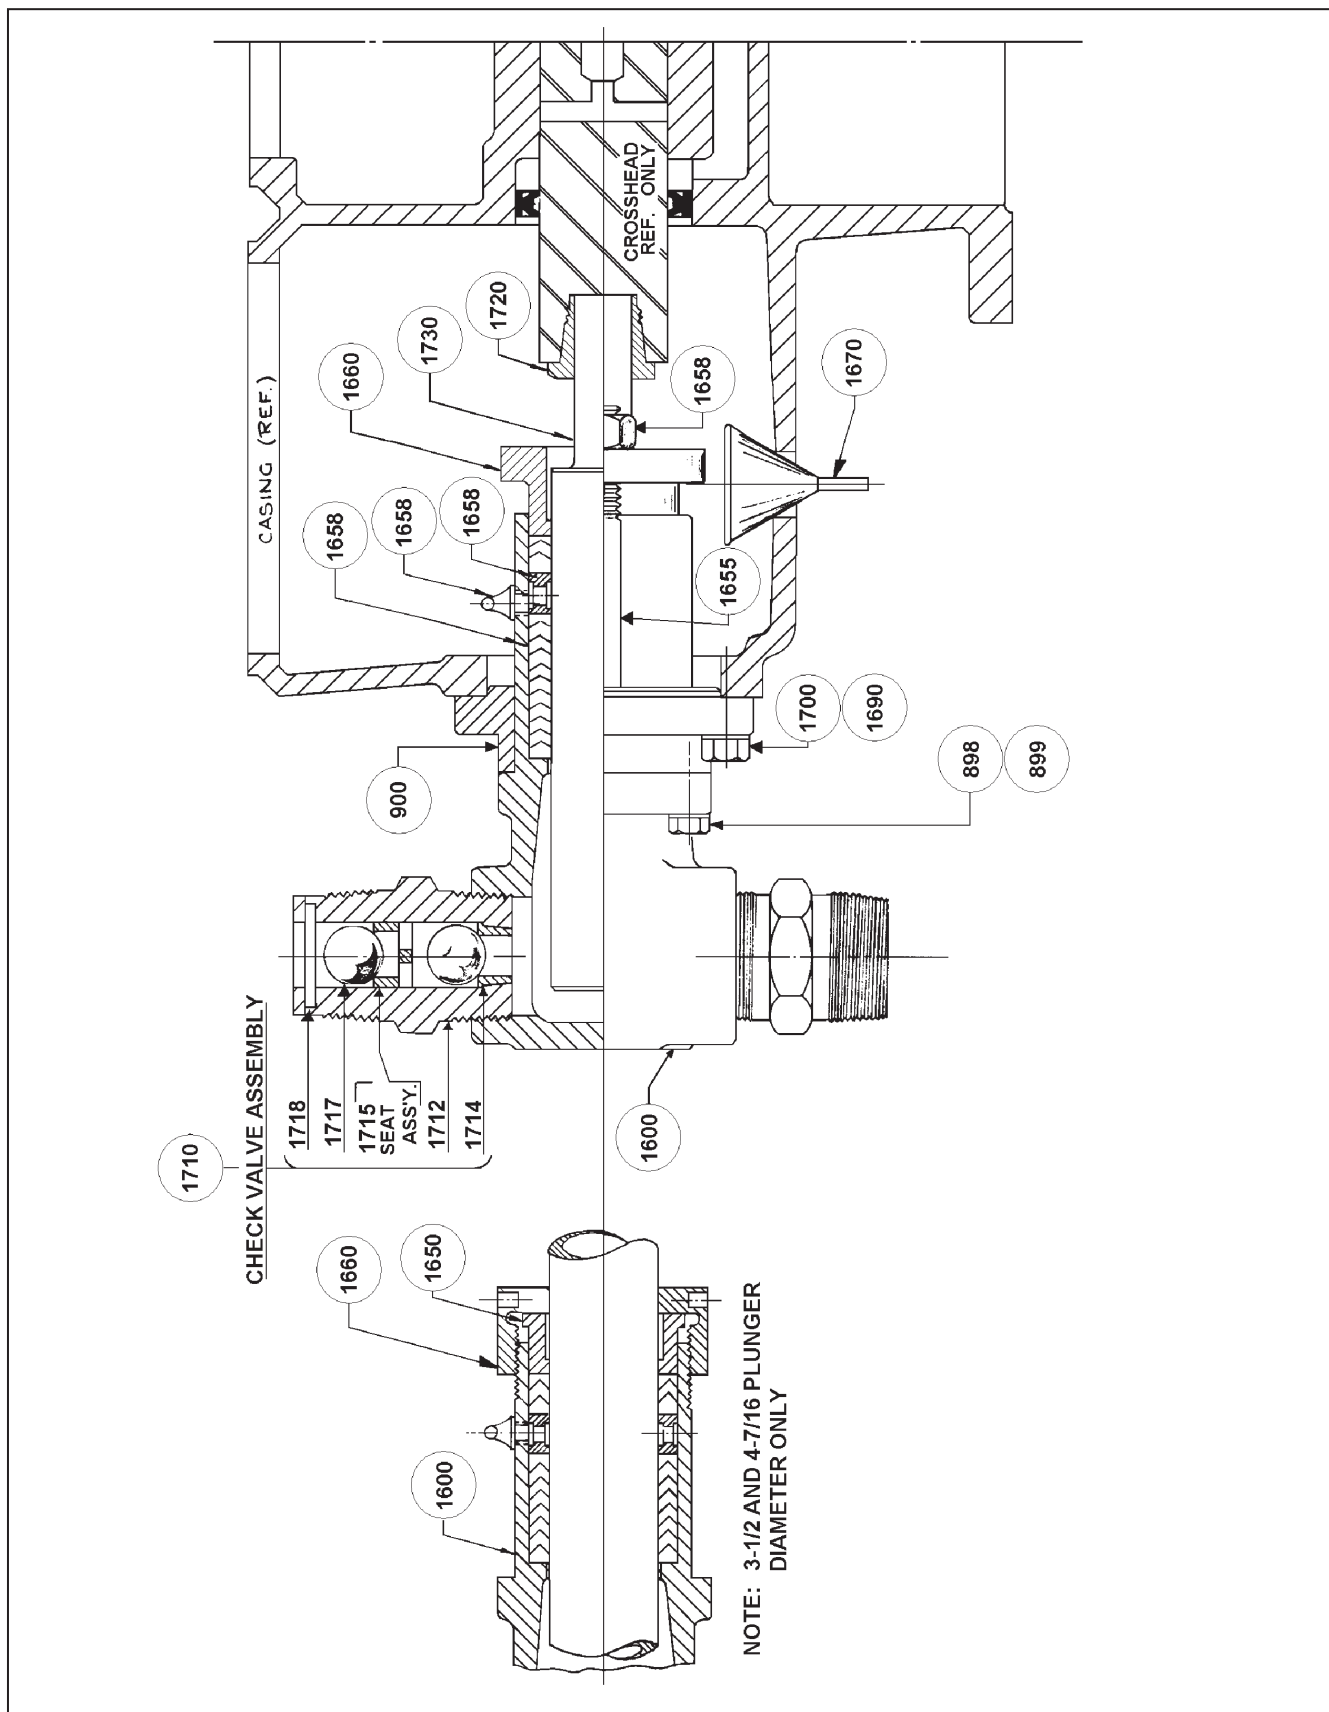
Liquid End Assembly (Plungers 2" THRU 4-7/16") For All Dates Of Manufacture. Cast Body Design. (DWG 102-2285-0007)
